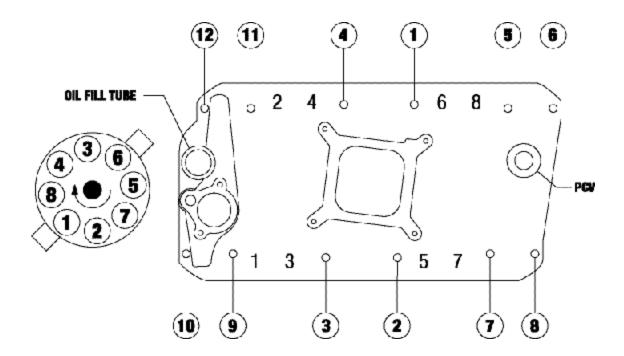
Intake Manifold Bolt Torque Sequence Torque Bolts to 25 ft/lbs. Firing Order: 1-8-4-3-6-5-7-2 Turn Distributor Counter-Clockwise to Advance Ignition Timing
